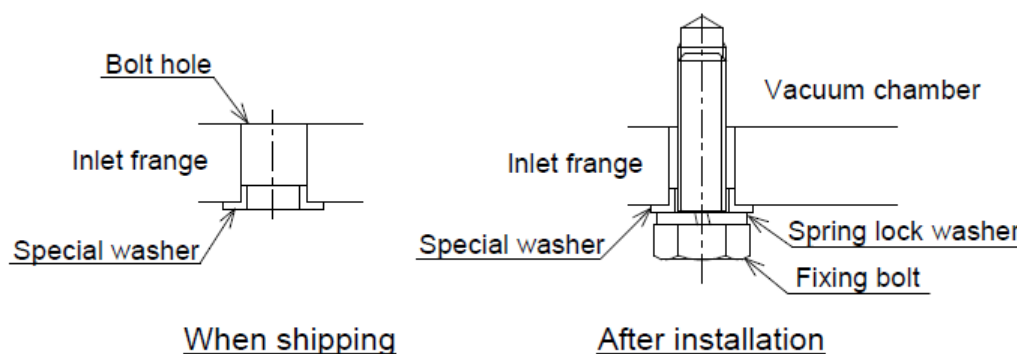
Example of the Fixing Method Using the Special Washer
